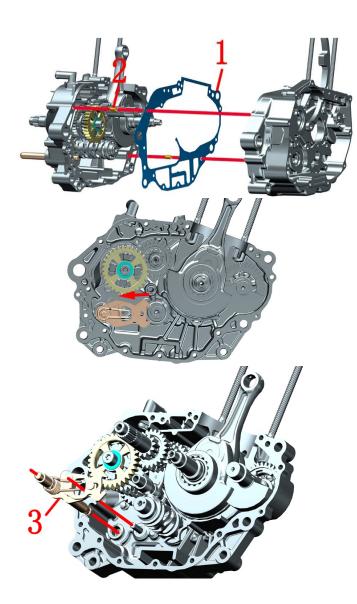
CRANKCASE		Crankcase Split 2	CHK	Q
